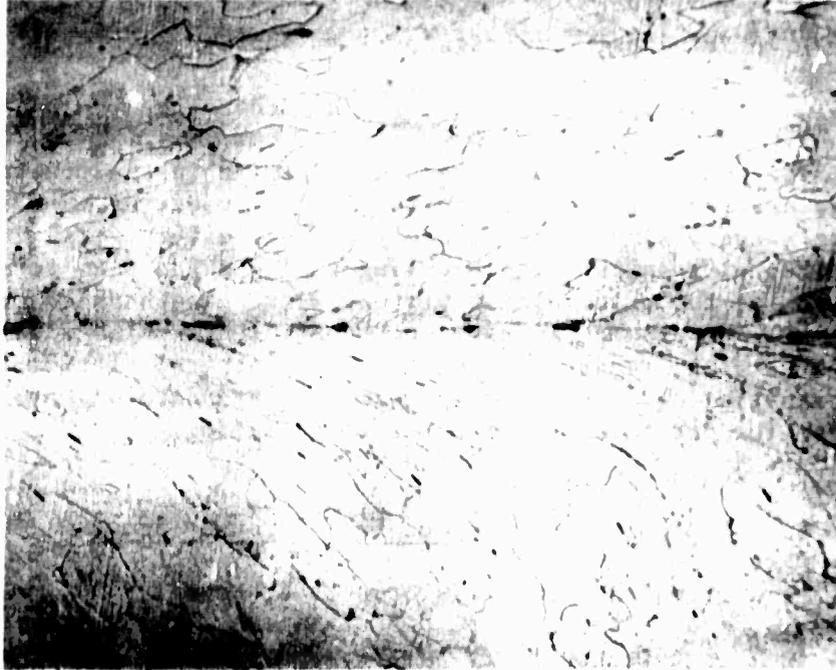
shows the weld obtained in this application. The bond line is horizontal along the center of the sample. This weld is now being used to construct cylindrical copper rings which are then stretched over a die to obtain a conical ring. The plastic strain in the stretching process is approximately 1½%. No weld failures have occurred in the fabrication of six rings.
